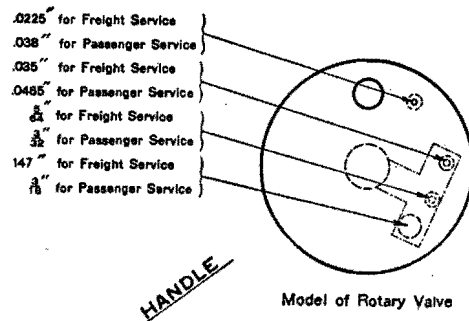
Rotary Valve and the Rotary Valve Seat of the Single Car Testing Device
